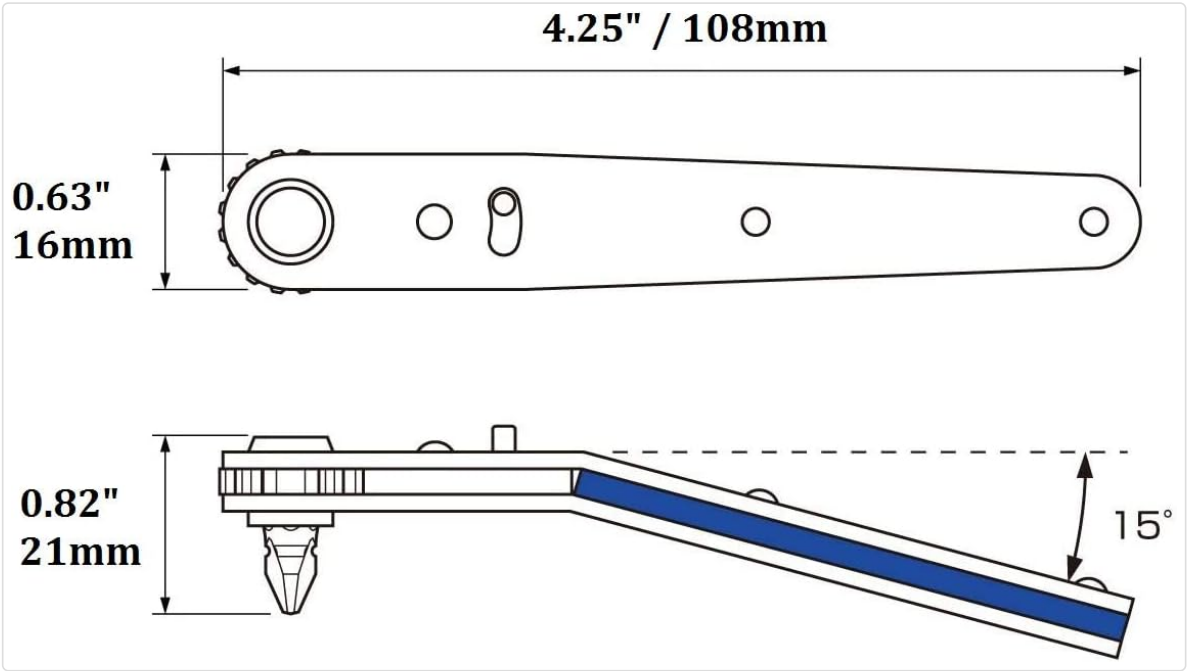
Detailed dimensions of the screwdriver, including length and thickness.
